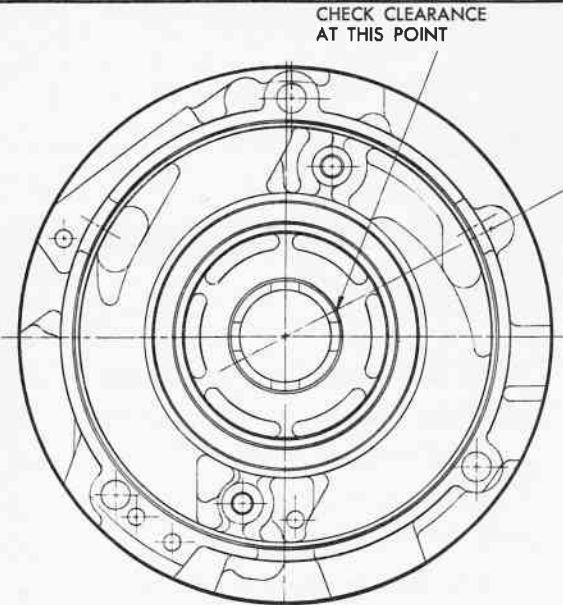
Point of Clearance Check - Front Pump Bushing and Torus Shaft
